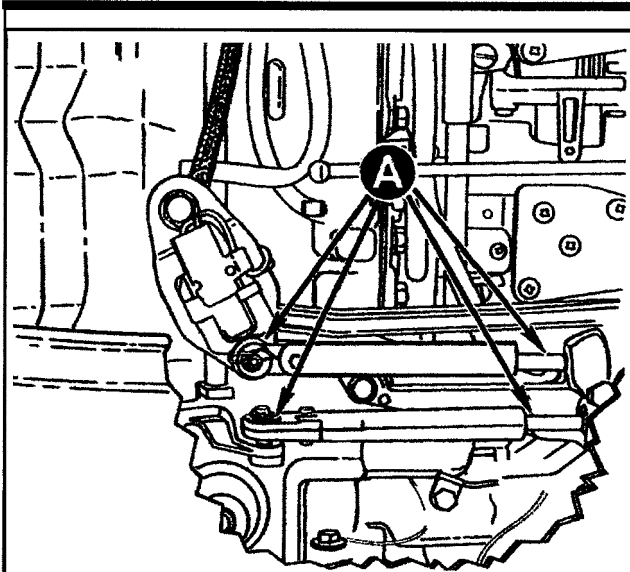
Throttle and shift linkage lubrication points-75-115 Hp (1726cc) V4 and 105 Jet-175 Hp (2589cc) V6 motors (carbureted shown, FICHT very similar)
